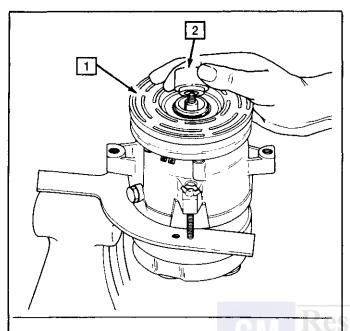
Removing Pulley Rotor & Bearing Assembly Retaining Ring
